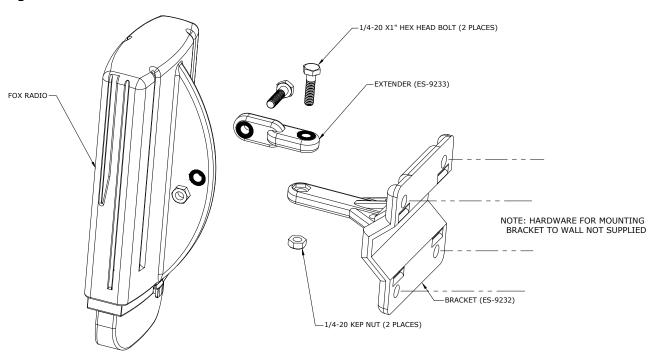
FOX5800-D Mounting on AD5800-25 Reflector
